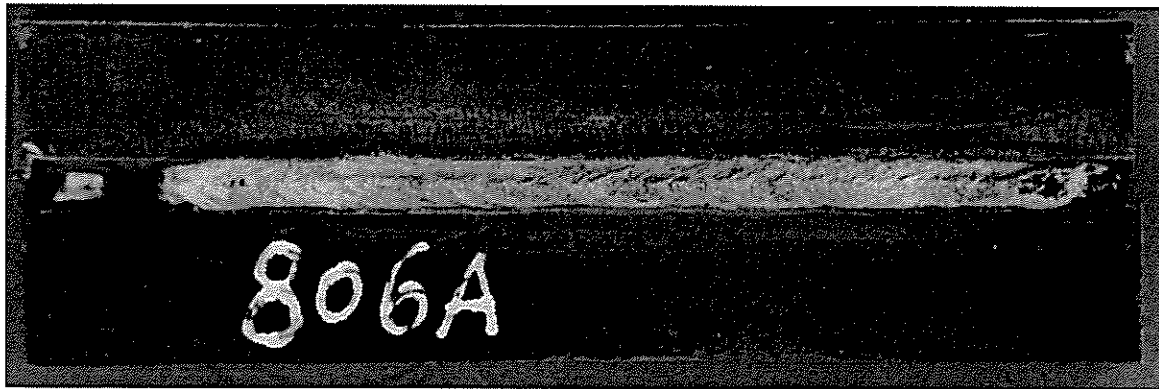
Appearance of weld in V-groove joint with gas cavity control
